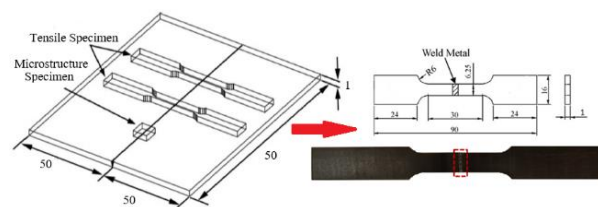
Schematic diagram showing the dimensions of laser-welded specimens used in tensile tests.
